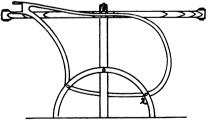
SHOWING DETAIL OF FRONT GEAR.
